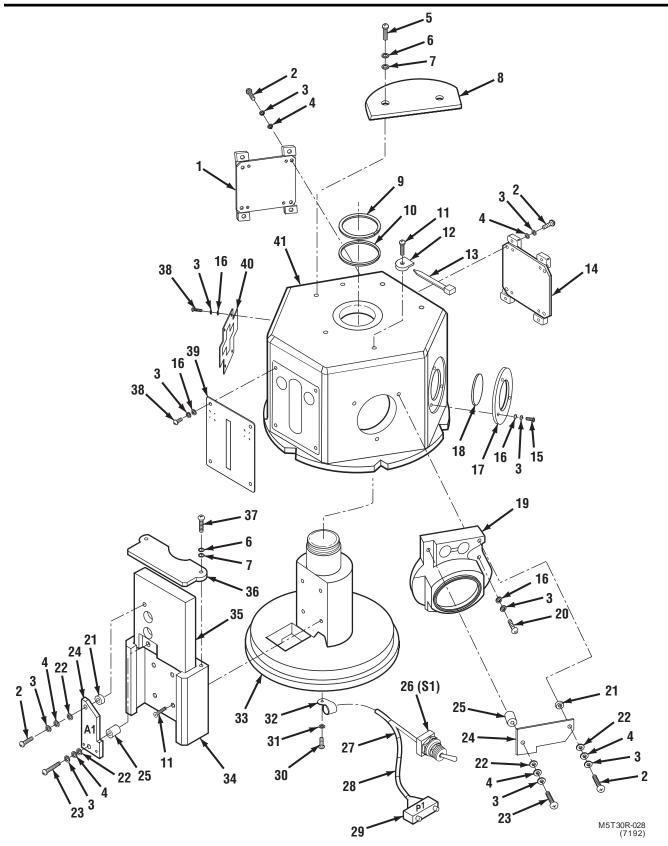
Group 04D010102 Spindle and Drum Assembly SM-D-807126
